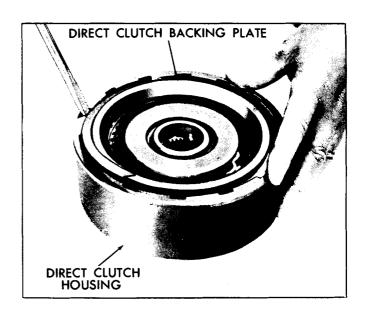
E-125 Removing or Installing Backing Plate Snap Ring
